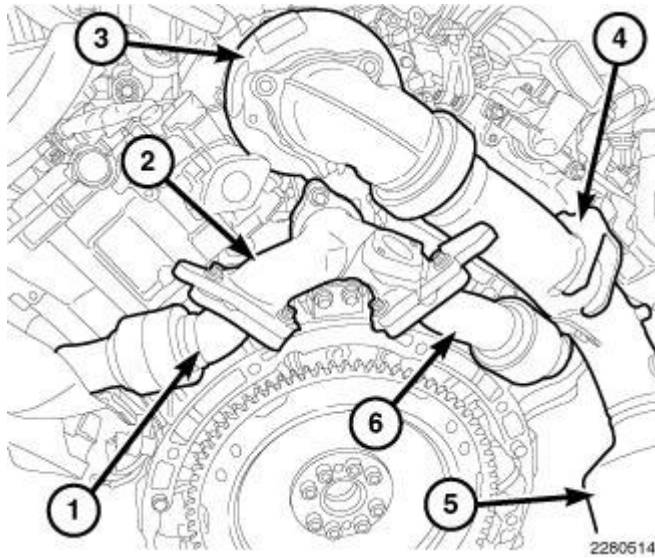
EXHAUST MANIFOLD & TURBOCHARGER MANIFOLD
